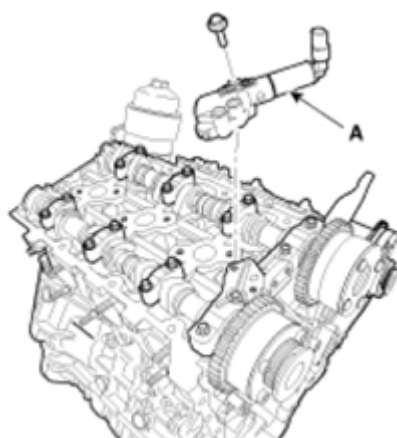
Identifying Exhaust Camshaft OCV (2 Of 2)
